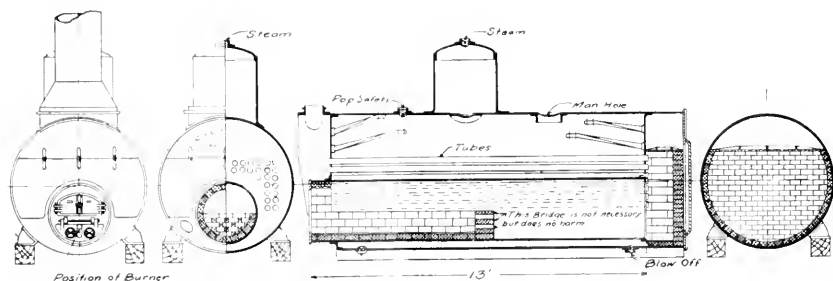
Arrangement of Internally Fired Boiler Specially Designed for Oil Burning.
